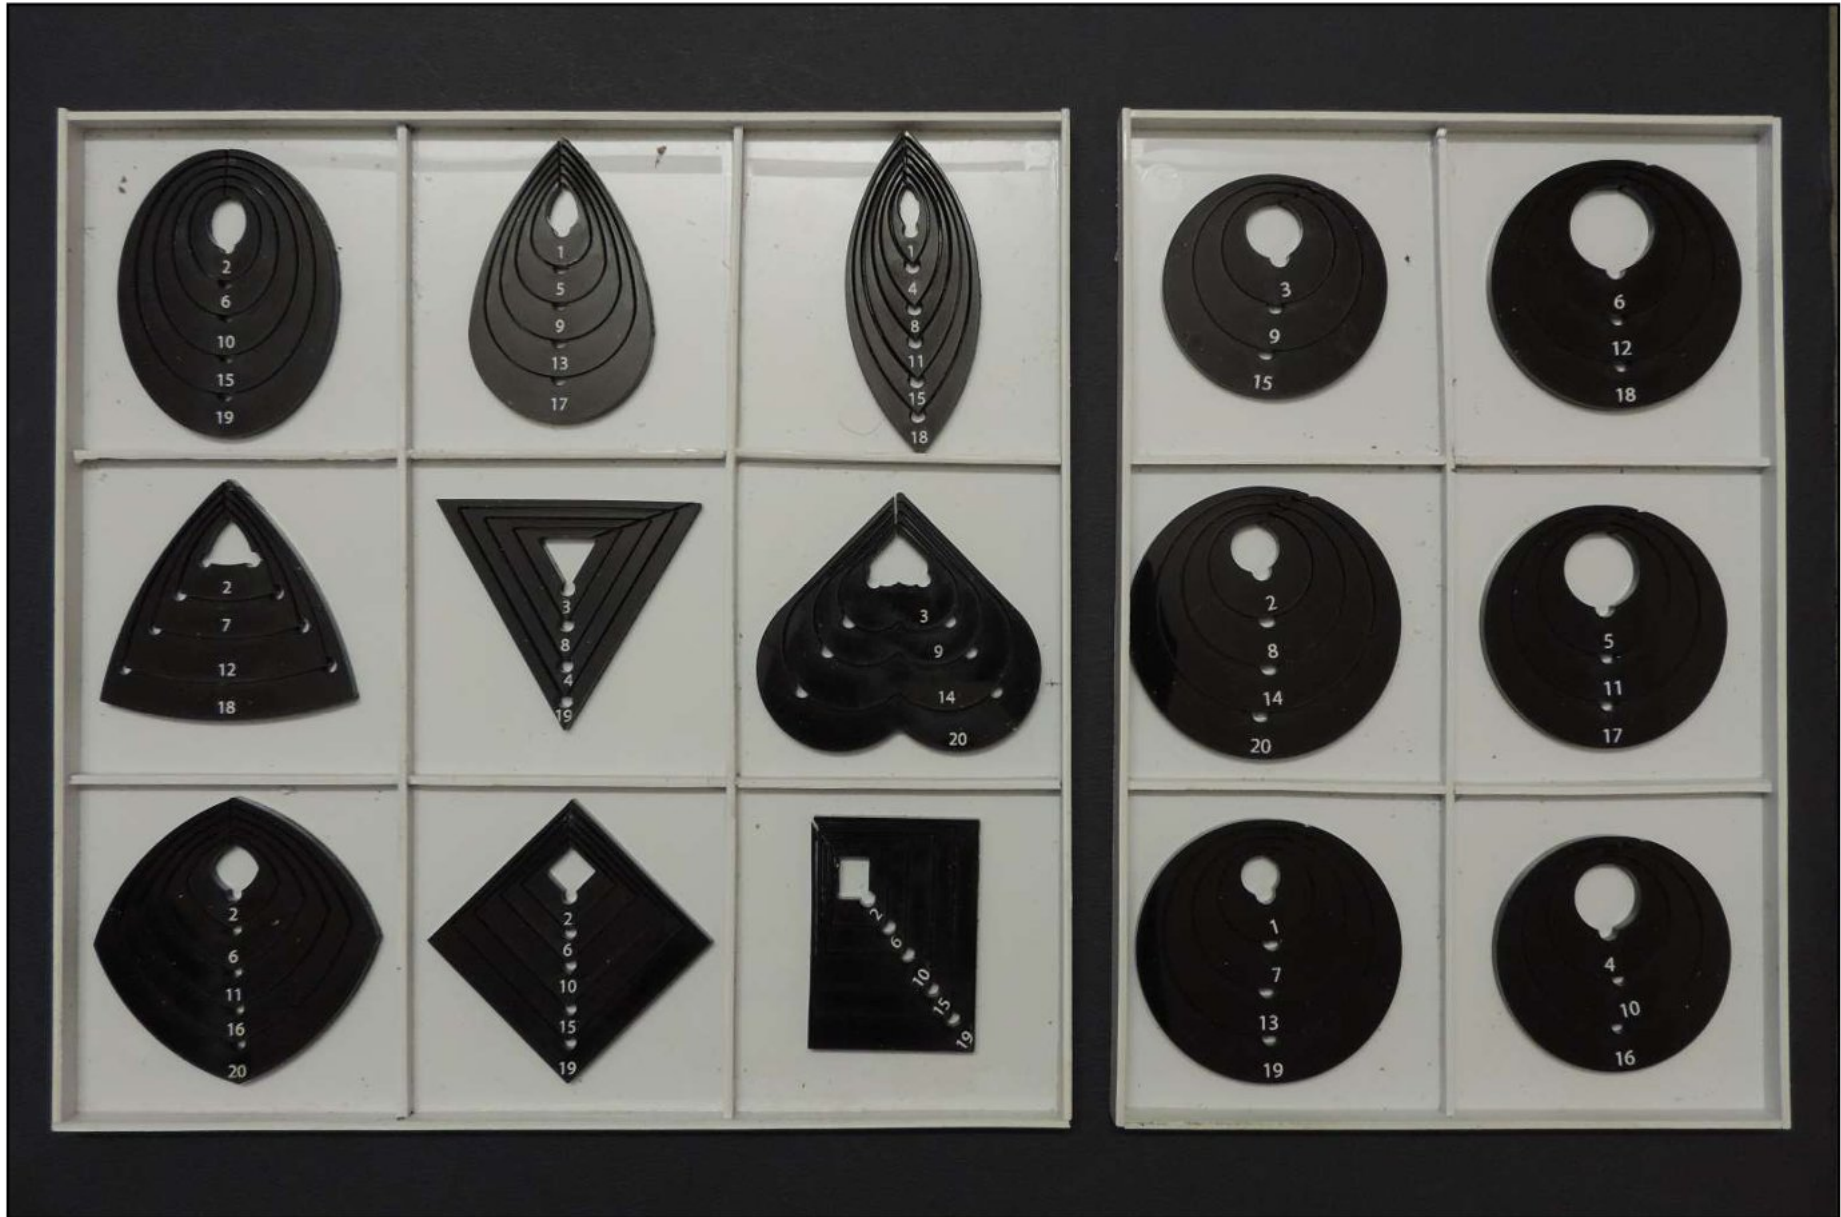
showing the kit of fixtures and jig of shapes
